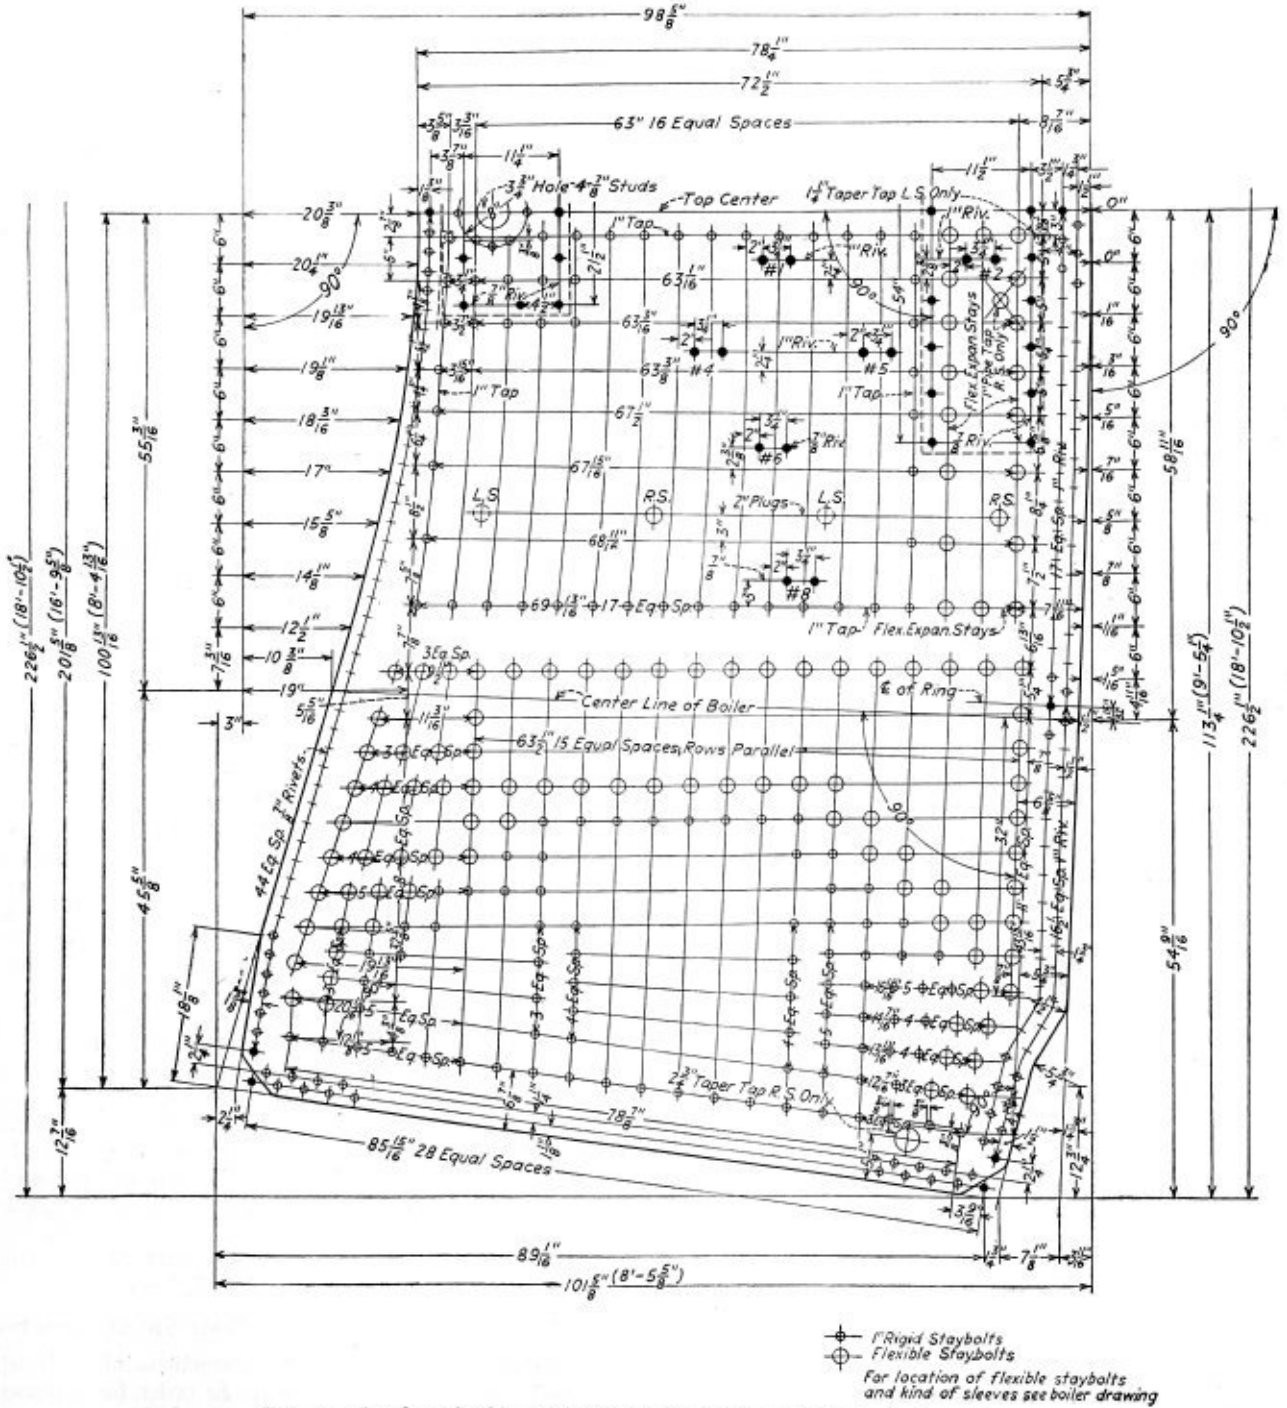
Roof and side sheet showing rivet and staybolt layout
